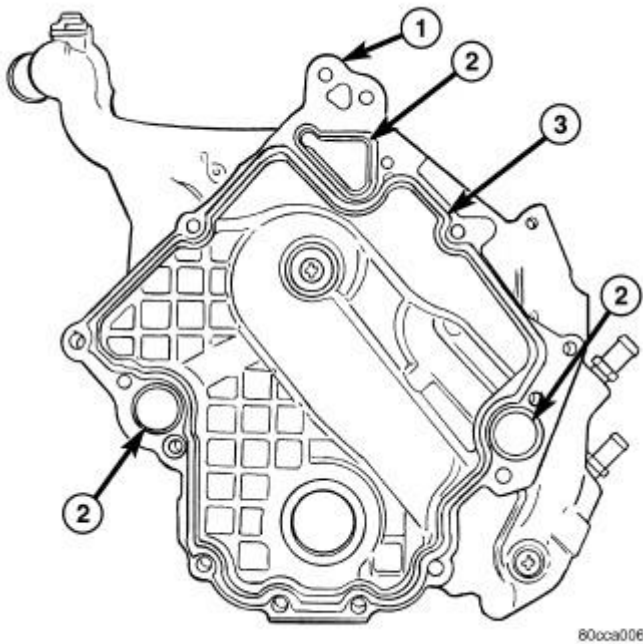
Timing Chain Cover, O-Rings & Sealant Location
